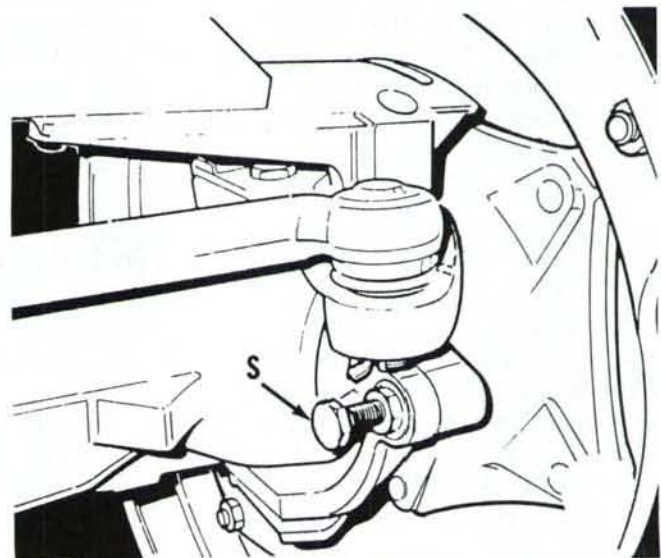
Steering stop screws (S) should be adjusted to prevent tires from touching any part of tractor when wheels are turned.
